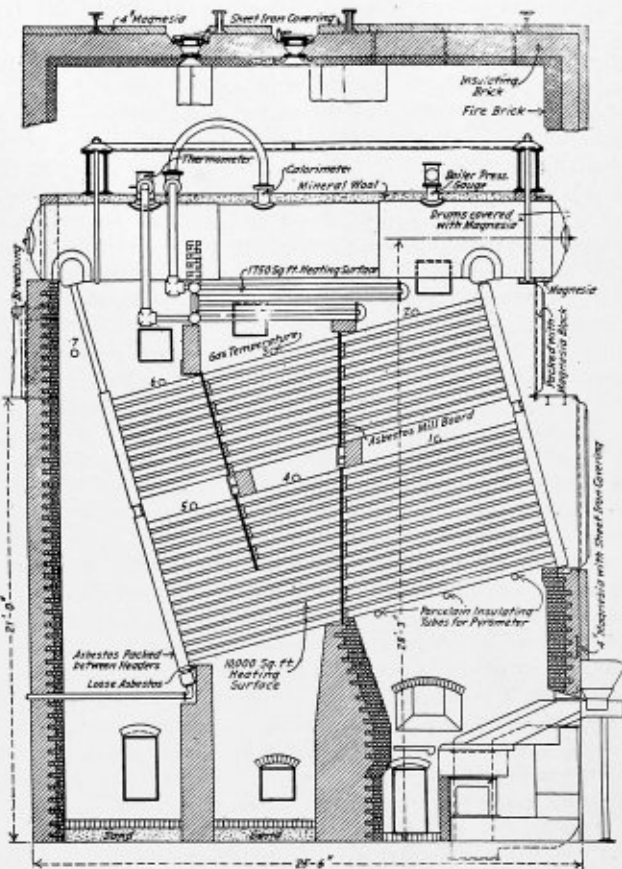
LONGITUDINAL SECTION OF BOILER
